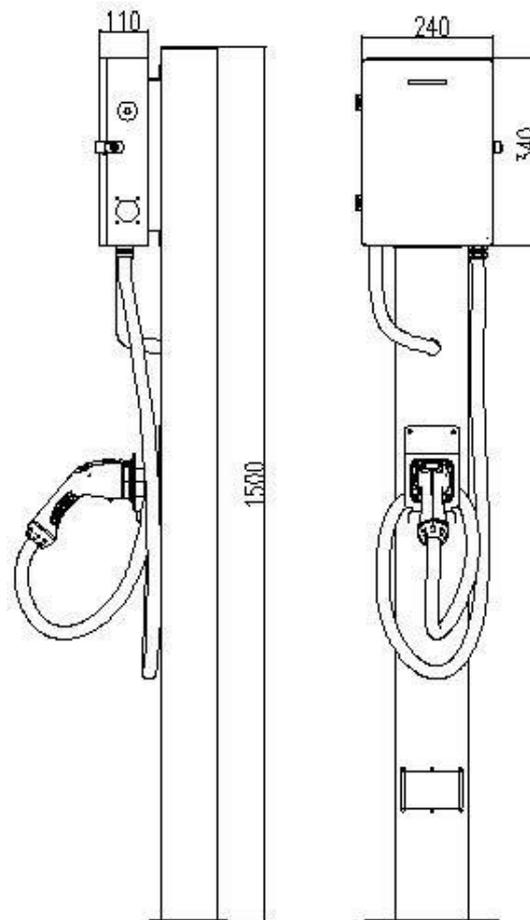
Dimensions of Floor-Standed Equipment
